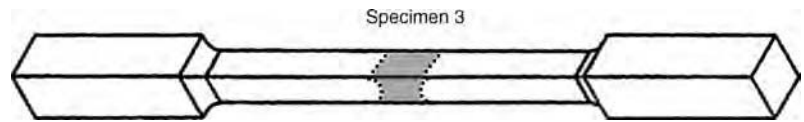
Initial geometry for the tensile specimen cut from the welded plate. Shaded region shows approximate location of stirred zone depicted in Fig. 19.
